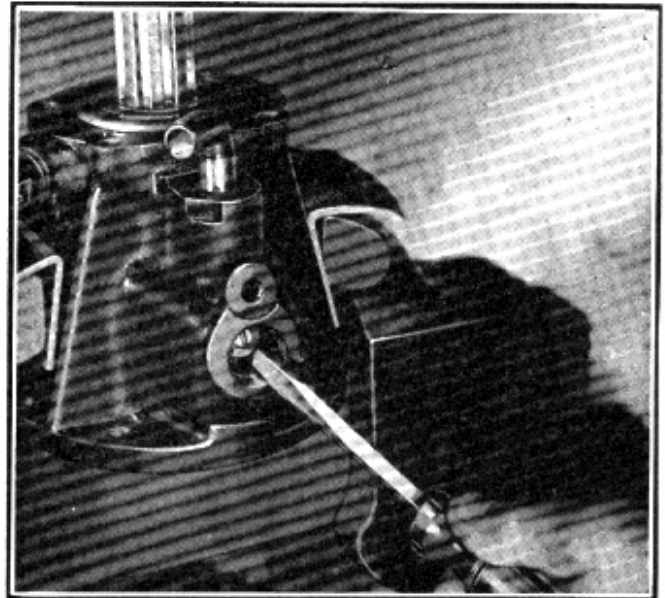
Front Axle Shift Fork is Held to Shift Shaft by Set Screw as Shown
